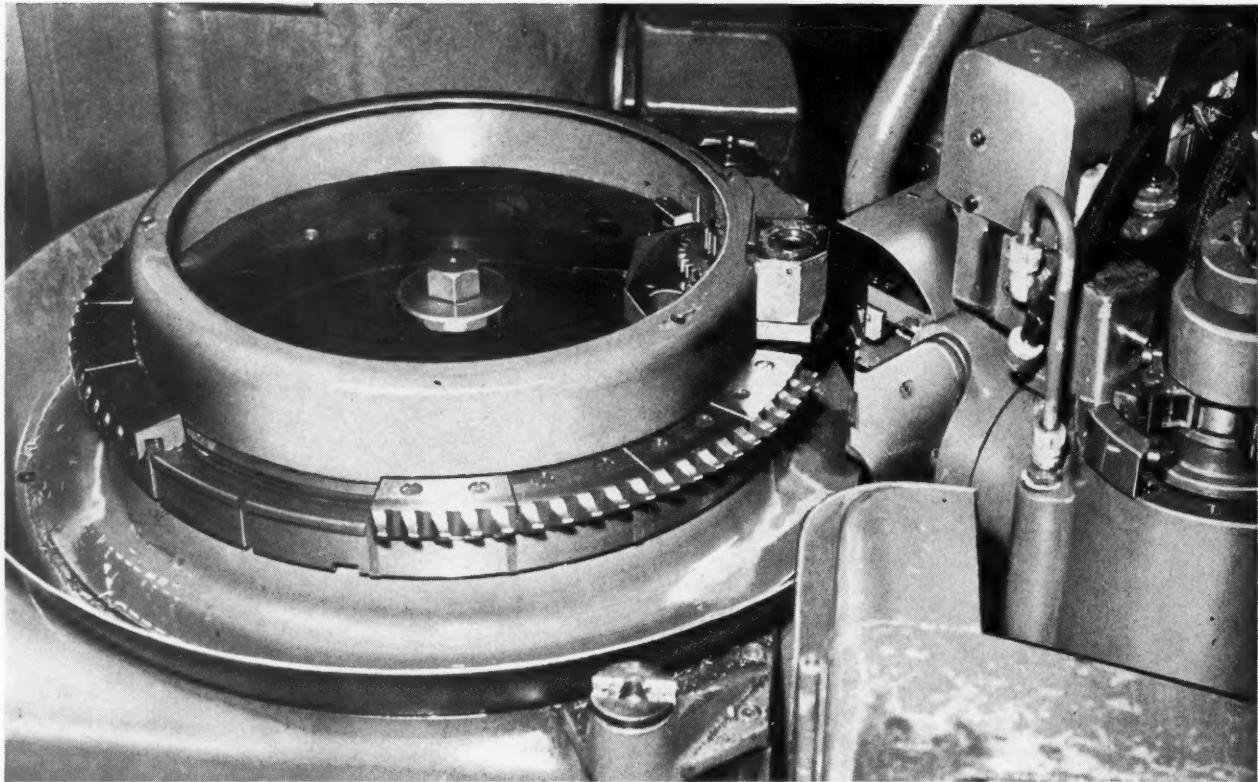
A single cutter blade, seen opposite the gear blank, which is rotated by means of a sun gear in the cutter cover (not shown), removes burrs by chamfering the back-angle profile of the tooth space
